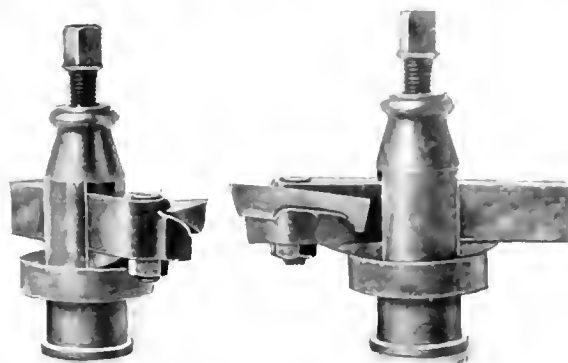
A Simple and Rigid Tool-holder, using a Blade of Triangular Section
